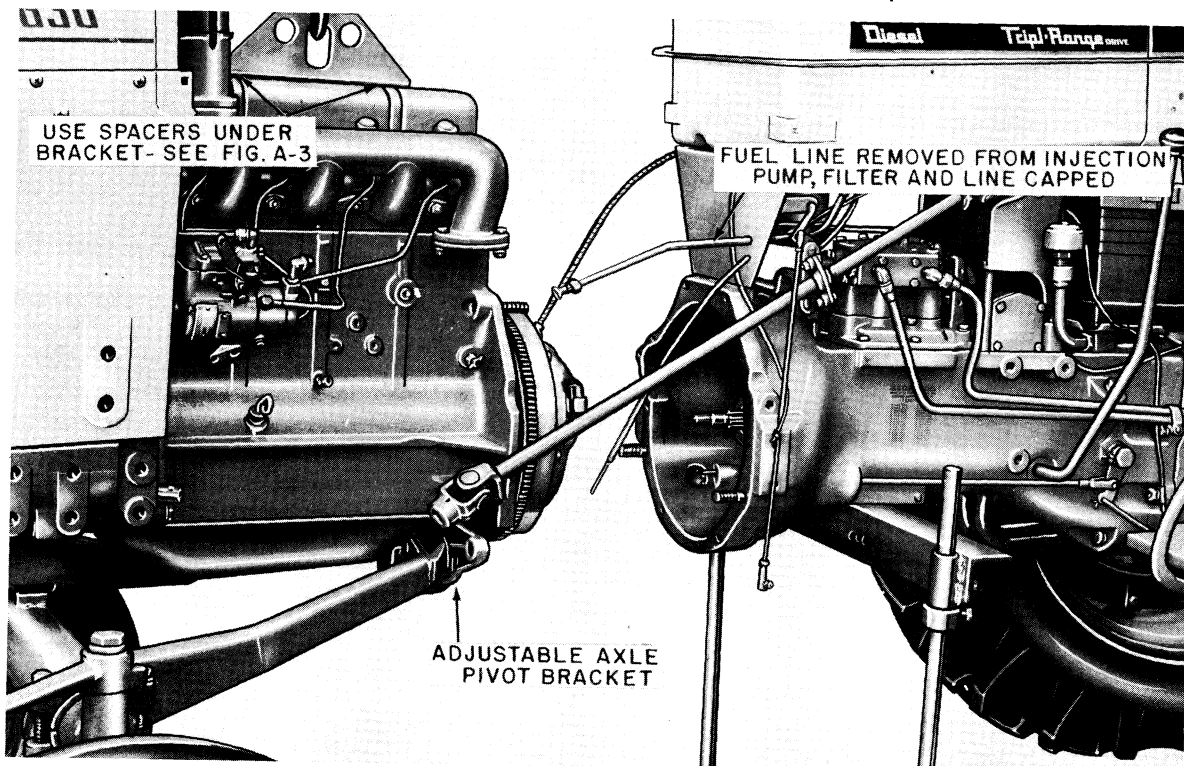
Dry Clutch Drive Tractor - Split Between Engine and Torque Tube
